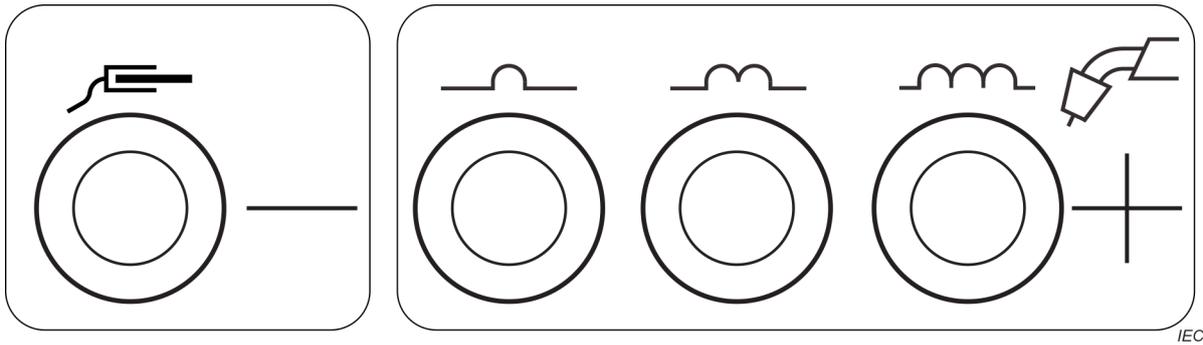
Terminals with inductance selector for MIG/MAG welding
